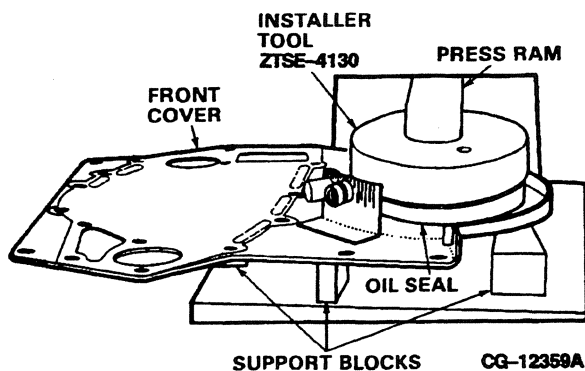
Pressing New Seal in Engine Front Cover Using Installer and Support Blocks
